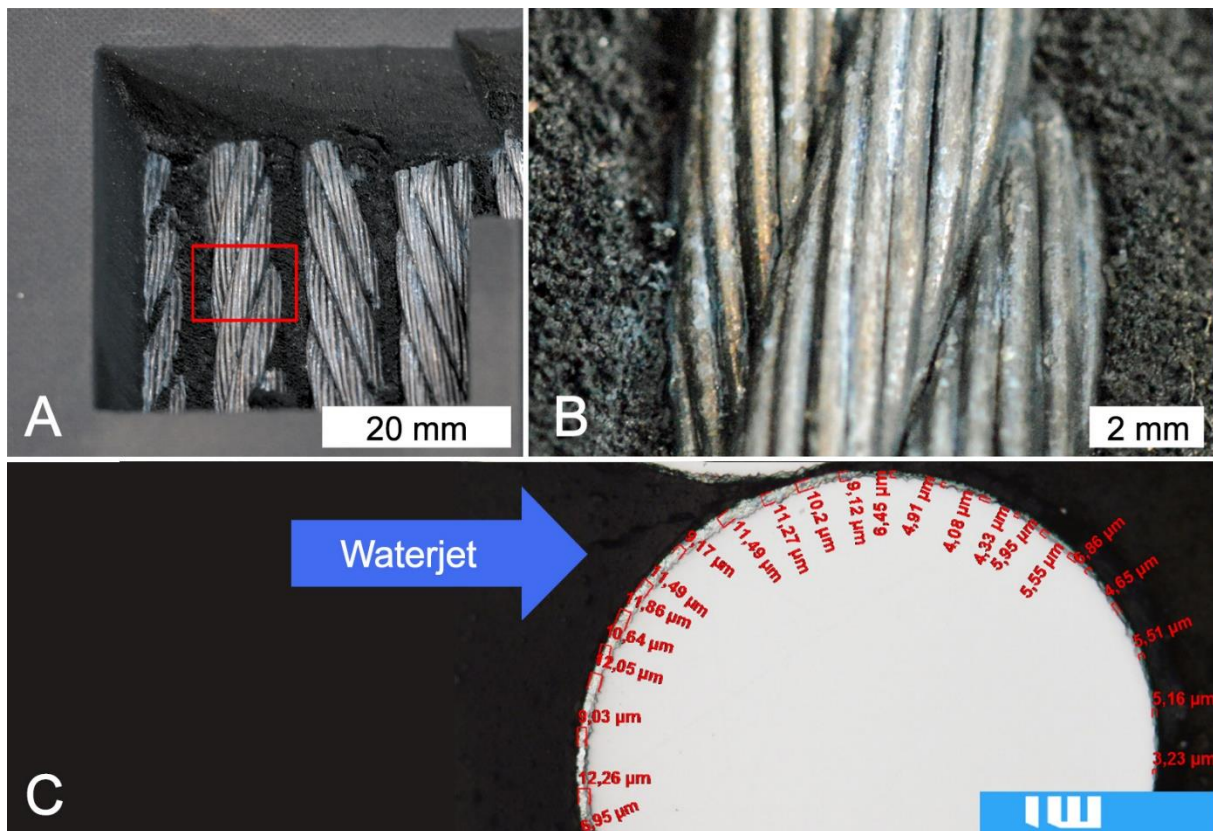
Stripped steel cords after iterative removal of the cover plate (A), detail view (B), micro section of a stripped cord with measurements of the zinc coating thickness (C)
